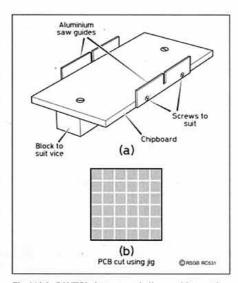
(a): G3VTS's home-made jig used for cutting chequerboard slots in the copper covering of PCB material. (b) Typical appearance of the board after cutting, providing square or rectangular lands to which component leads can be soldered.
